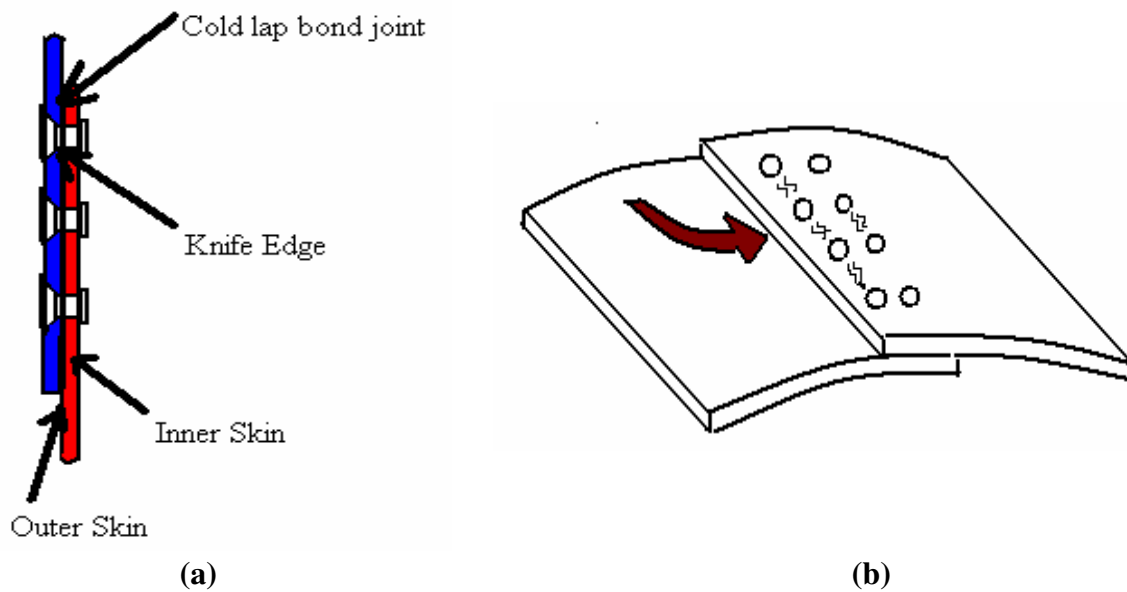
(a) Lap Joint Design (b) Multiple site damage [15]
